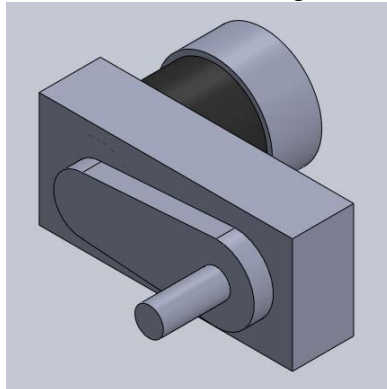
Model of 2011 BattleBot team Catstrophe, Motor and Gearbox
